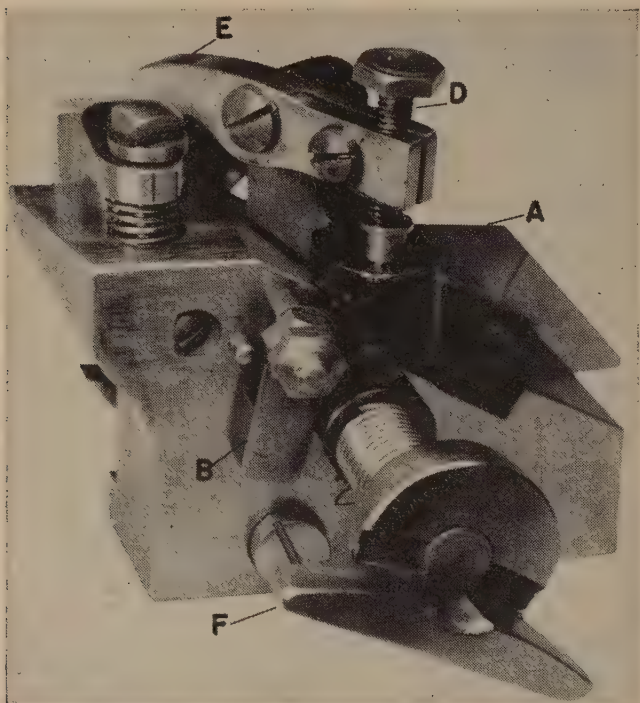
Outside view of cam ring section from 24-inch, 32-feed Brinton S.S.W. machine.
